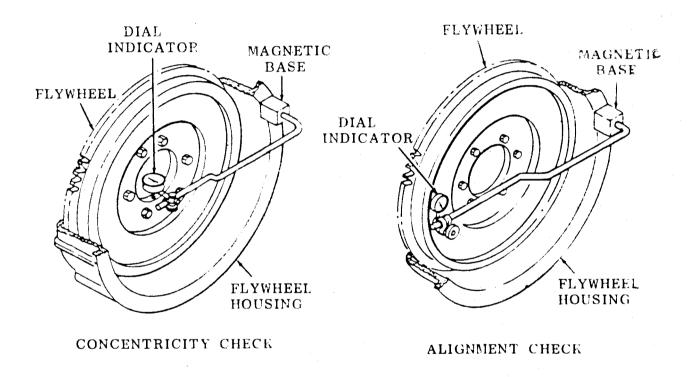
Checking Flywheel Concentricity and Alignment.
